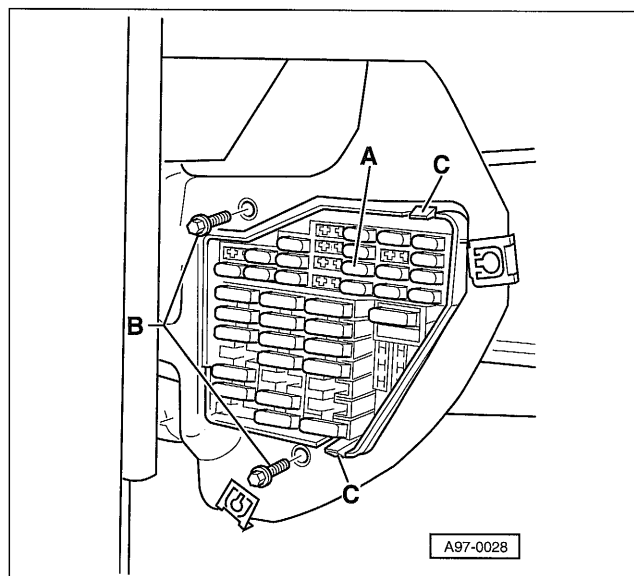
Remove mounting screws (B), press retaining clips (C) and push fuse panel (A) inward to remove.
